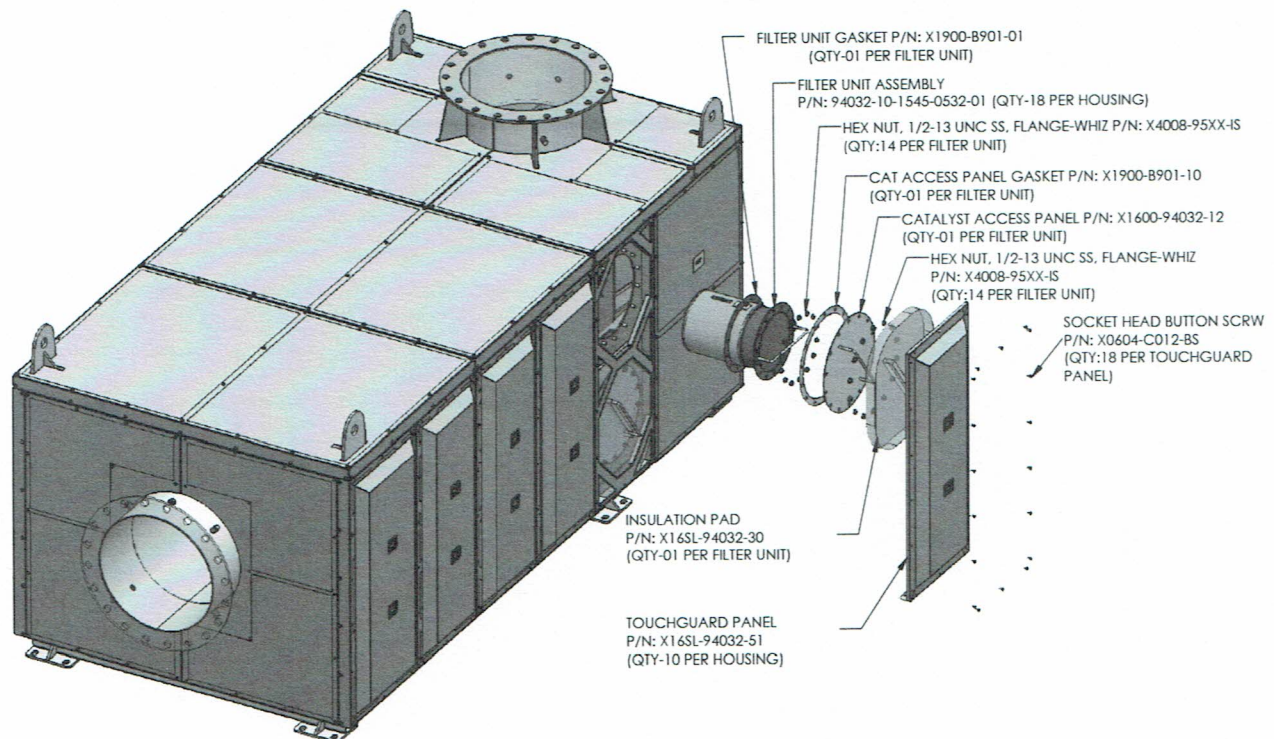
Example of SCRonF Housing with Filter Unit Exploded View
